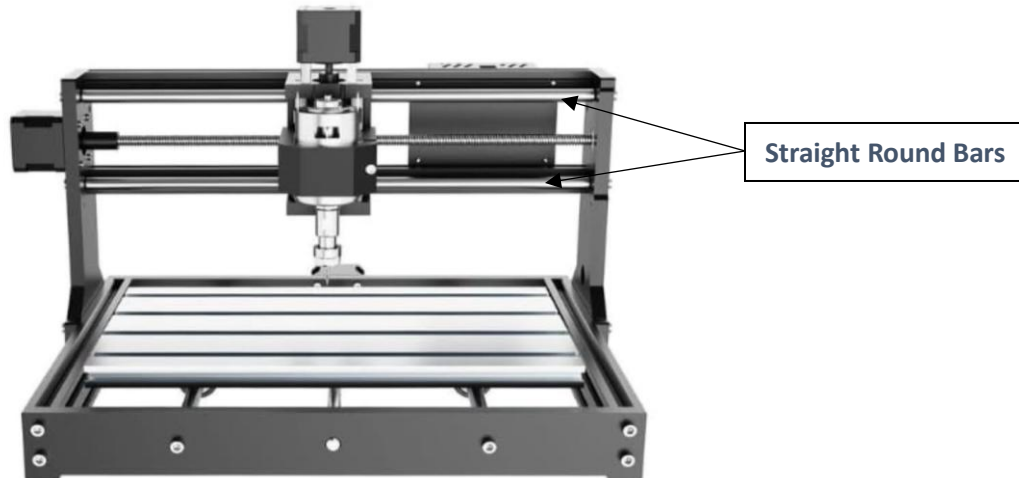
Photograph of 3IDEA Two Trees TTC3018S CNC Router Machine with Upgraded CNC Software Including Dust Collection System, End Mills and Router Bits [88]
